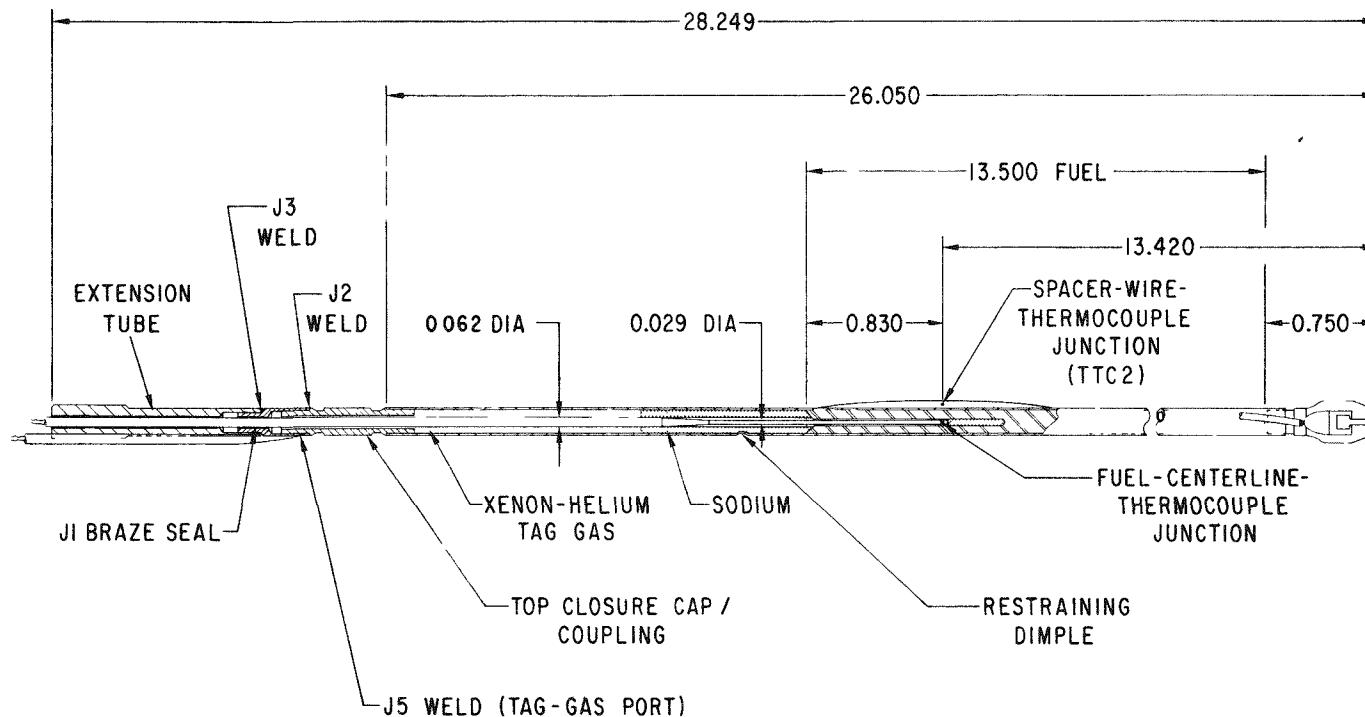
XX08 Fuel Element with Fuel-centerline Thermocouple and Spacer-wire Coolant Thermocouple. All dimensions in inches; 1 in. = 25.4 mm.
